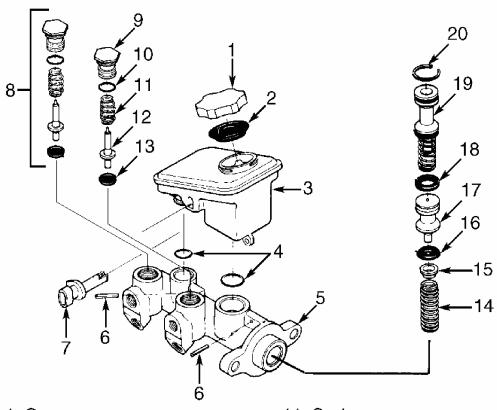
Exploded View Of Composite Master Cylinder (Except Montana, Silhouette & Venture)
